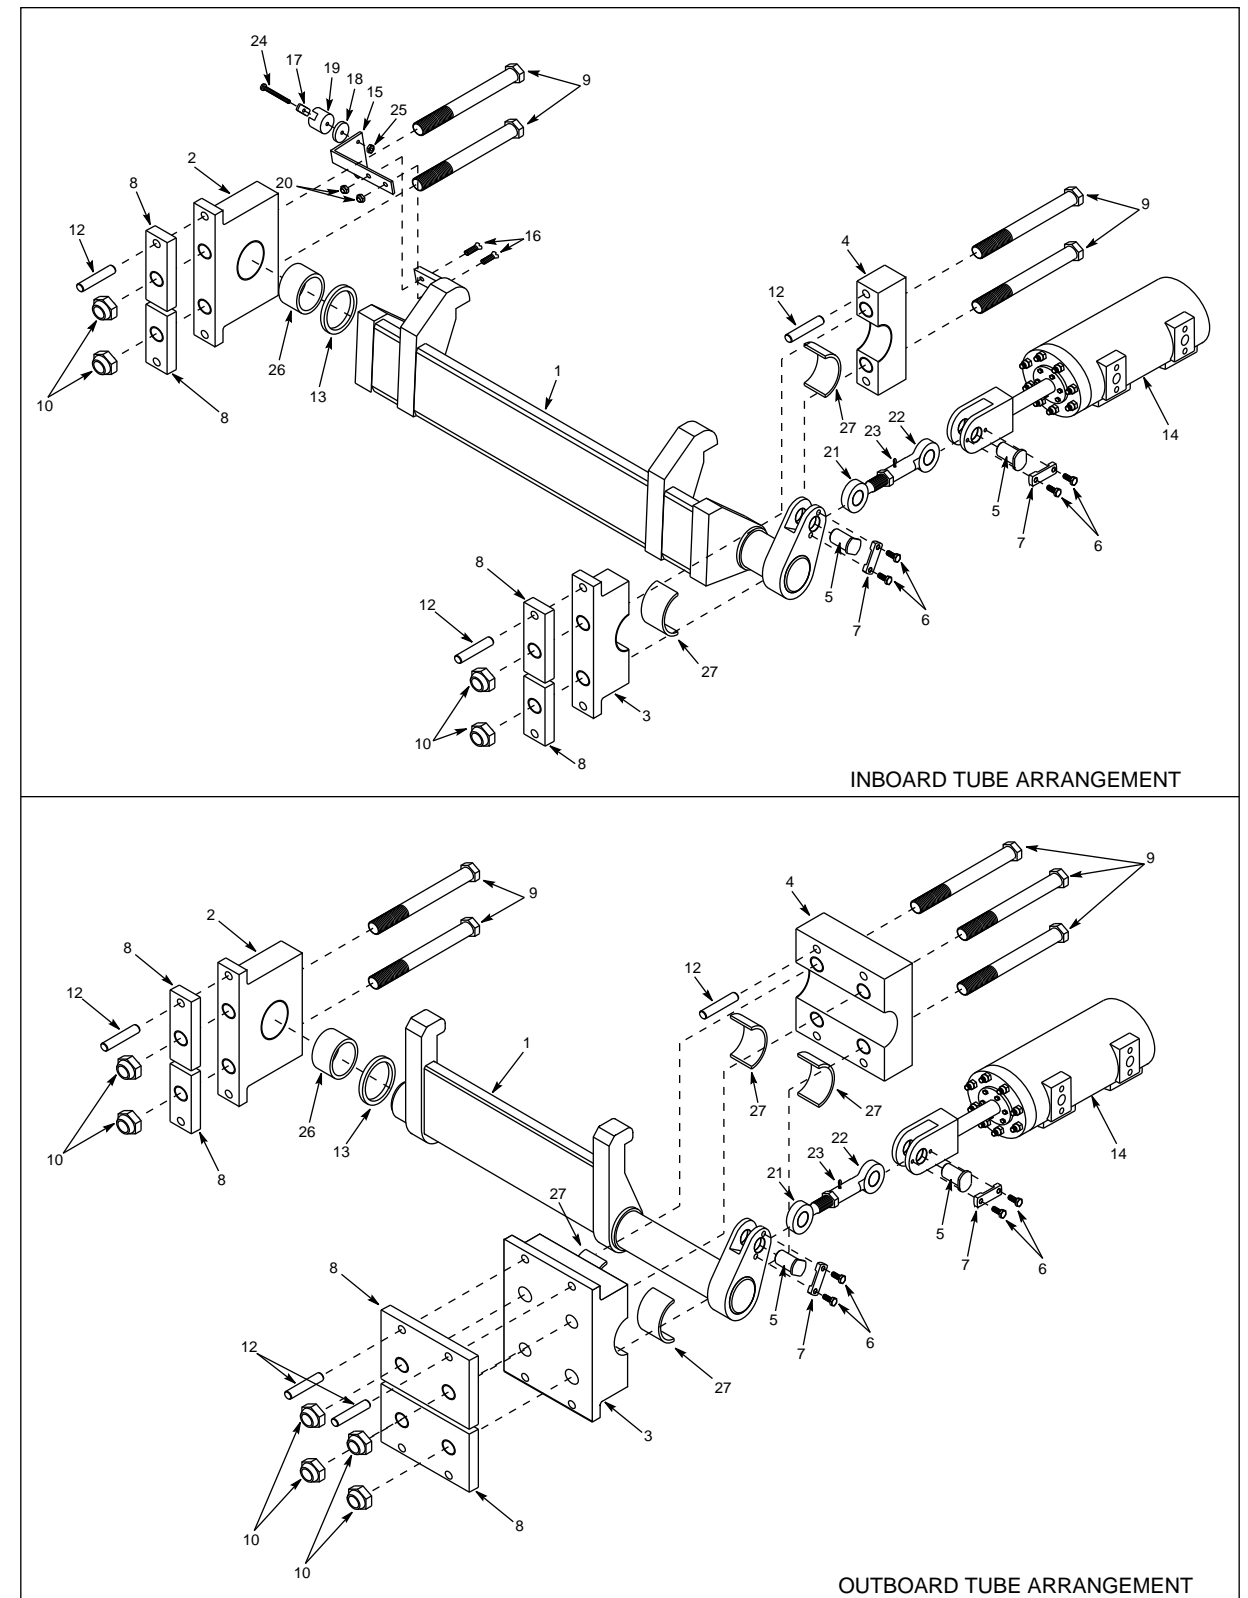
Fairing Locking Mechanism (SSN 721 and Later)
